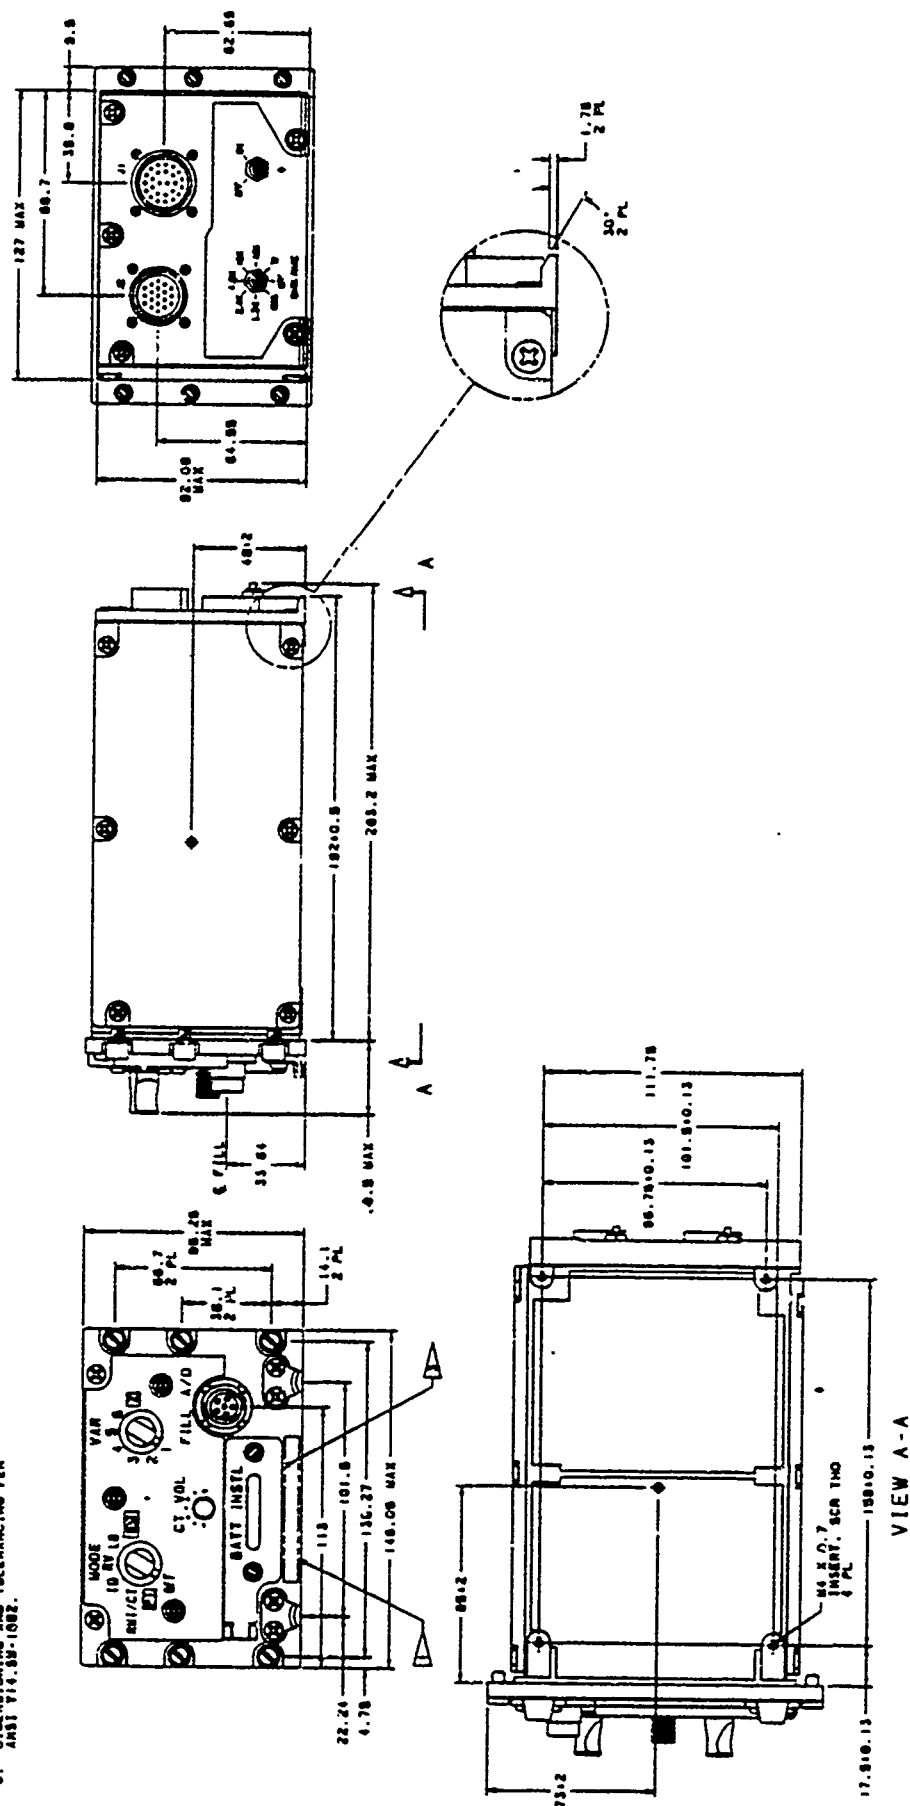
Installation Control Drawing, SDC - Panel Mount
